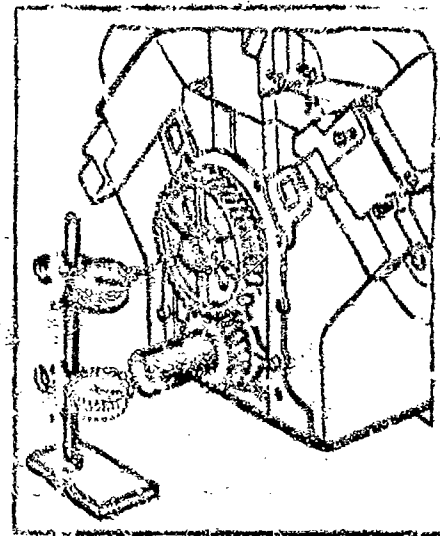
Checking axial clearance of the crankshaft and camshaft with an indicator
